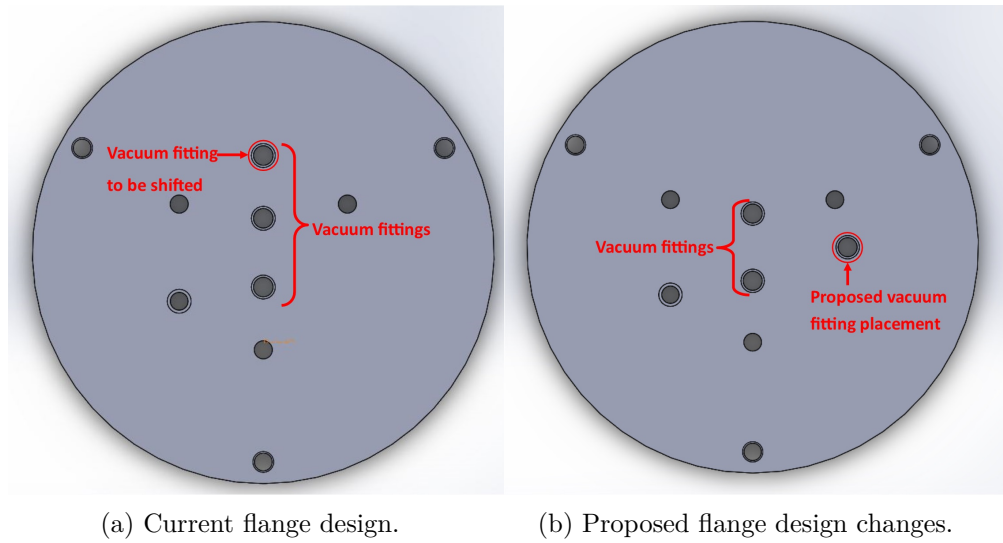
The position of vacuum fittings in the current and proposed flange design to allow for improved tool access.
